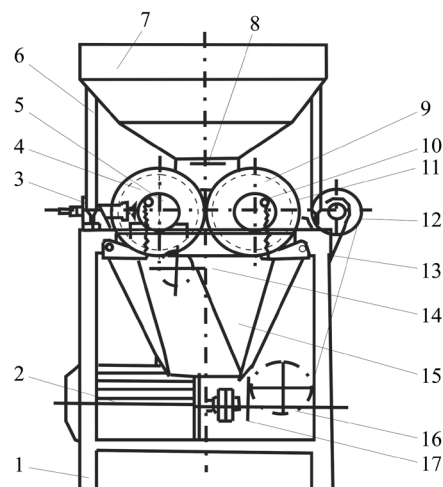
Schematic diagram of a grain feed grinder-miller (side view): 1 – frame; 2 – electric motor; 3 – pressure mechanism; 4 – movable roller; 5 – movable roller support; 6 – stand; 7 – hopper; 8 – damper; 9 – fixed roller; 10 – fixed roller support; 11 – scraper spring; 12 – roller drive chain; 13 – roller cleaning mechanism; 14 – drive chain tensioner; 15 – chute; 16 – gearbox; 17 – coupling
